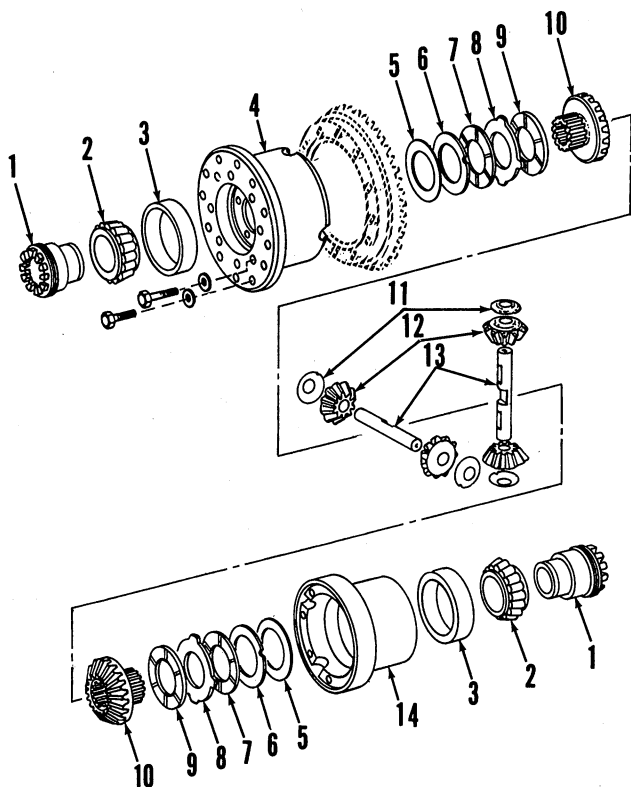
Exploded view of differential assembly. Note that thick friction disc (9) is installed next to side gear (10) with friction facing towards separator plate (8). Shims (5) are installed between last separator plate and differential case.
